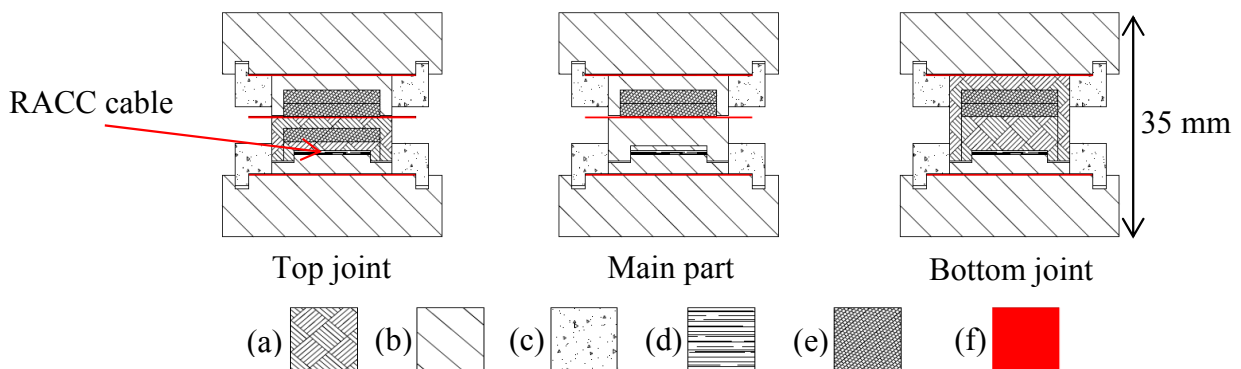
Cross section view of the sample holder housing the Roebel cable. The different materials used for the sample holder are also depicted: copper (a), stainless steel (b), G 10 (c), Roebel (d) Rutherford Nb-Ti cable (e) and Polyimide insulation (f)
